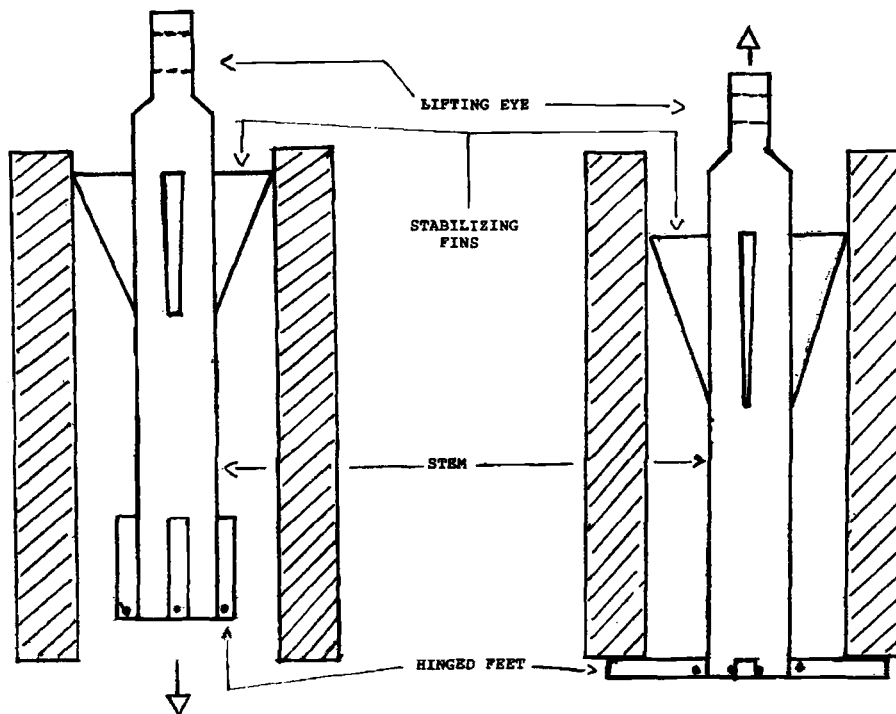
An example of cold heat treatment rigging that could be used to lift a long and heavy forged cylinder from a vertical furnace. The stem is dropped through the bore until the hinged feet clear the bottom of the forging when they drop down enabling the forging to be lifted quickly. The upper fins help stabilize the stem at the center of the bore, but do not obstruct coolant flow through the bore during quenching. The fixture does not need to be designed to withstand the furnace temperature.
